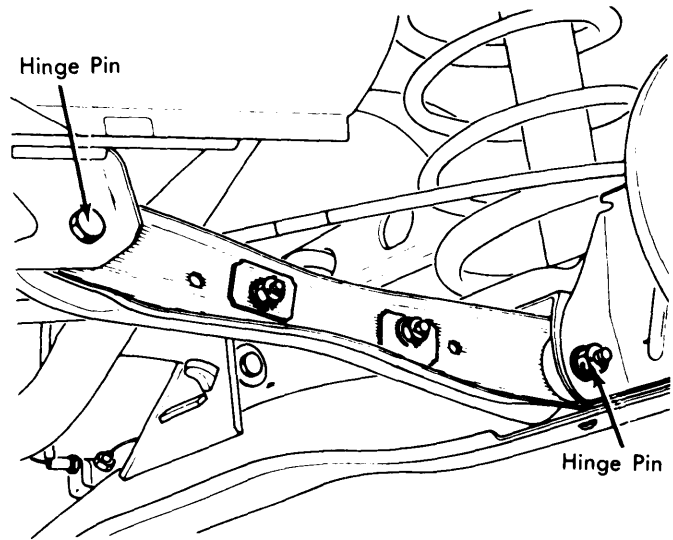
Detail of Rear Suspension Side Strut Assembly
